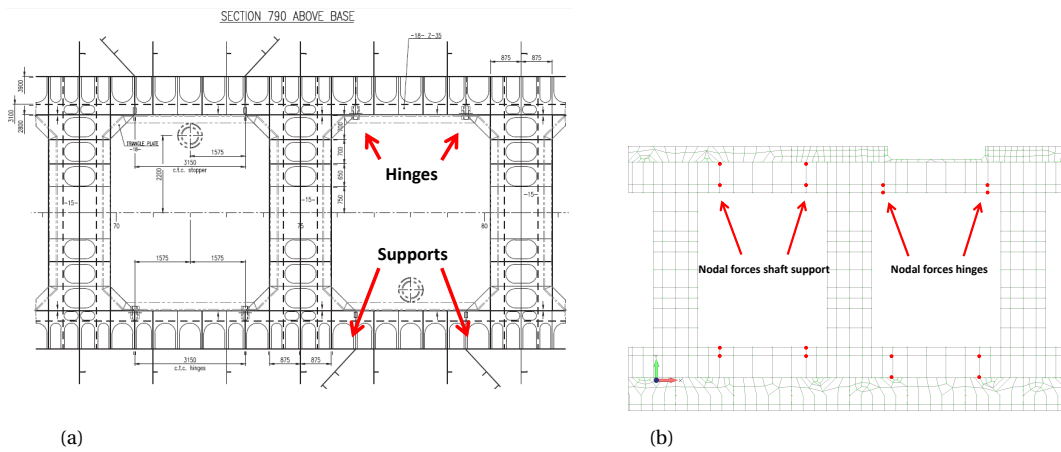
(a) Bottom view bottom door opening drawing, (b) Bottom view load introduction points bottom door
